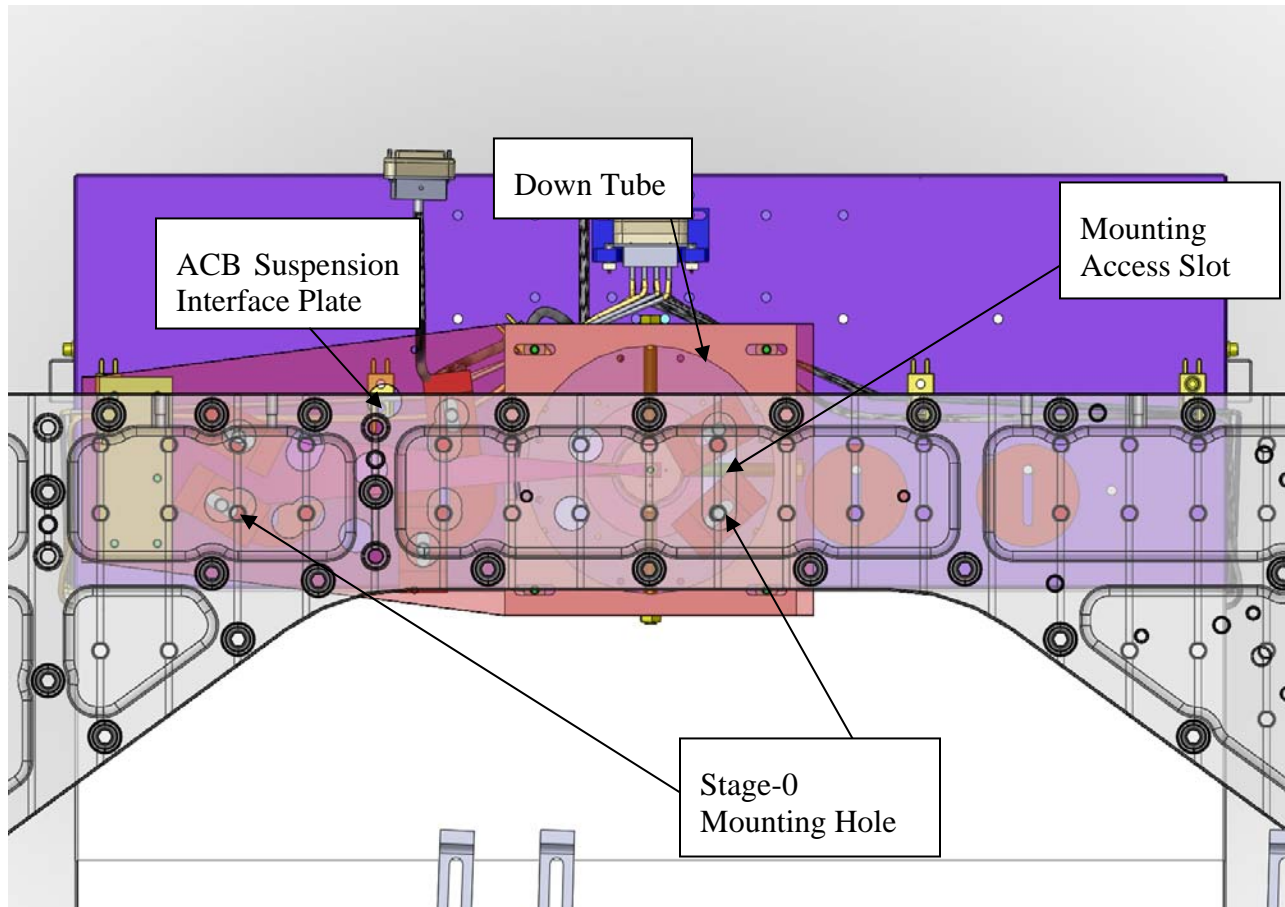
Detail of Arm Cavity Attachment to Stage 0
